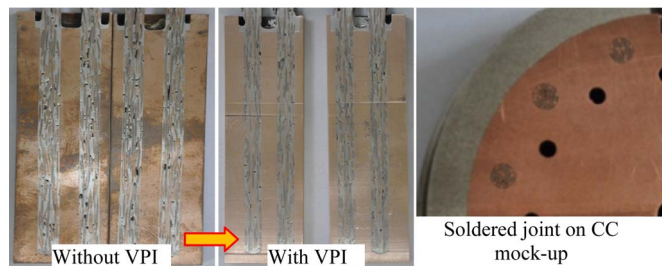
Soldered samples and soldered joint on CC mock-up.
